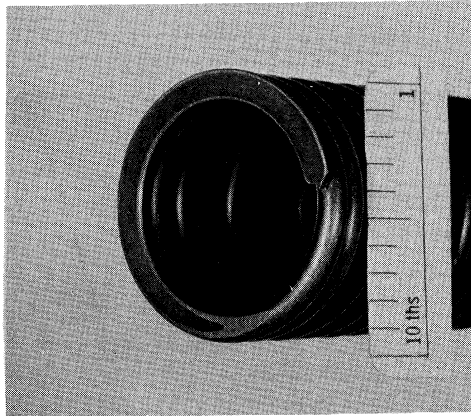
End detail of Inconel X—40% nickel-balance iron alloy bimetal tube-core configuration. Note core and jacket.
